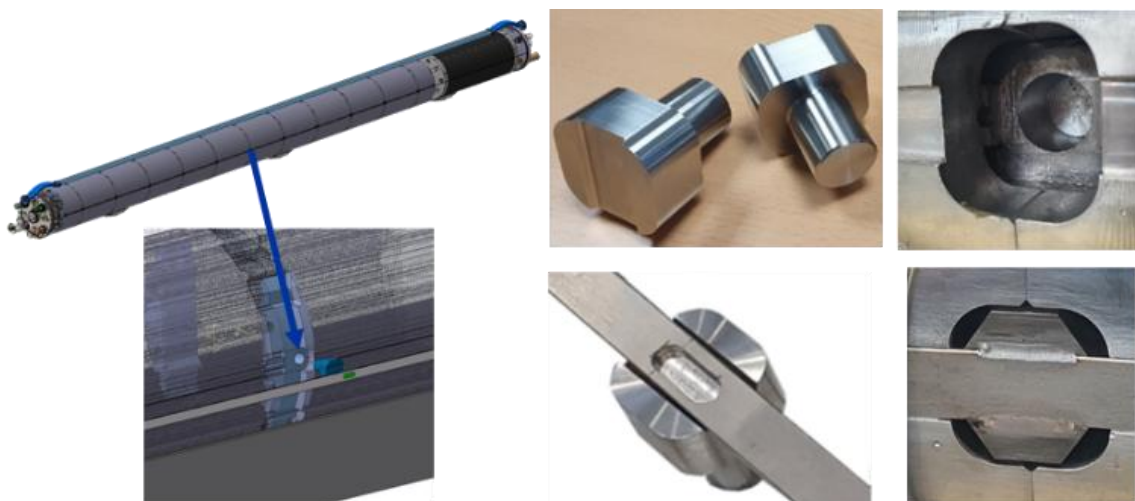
Implementation of fixed point between magnet structure (iron yoke) and welded outer shell for 7.2-m-long HL-LHC MQXFB cold mass at CERN. Left: location of fixed point. Right: detailed of fixed-point components and installation (Courtesy of H. Prin, CERN).
